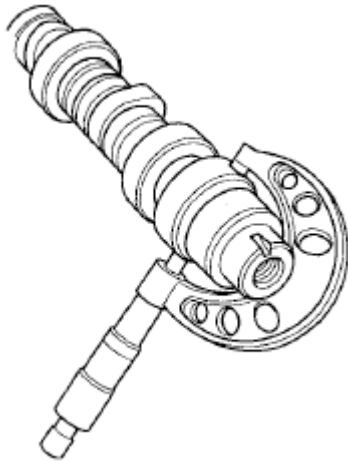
Identifying Camshaft Thrust Cover & Camshaft
